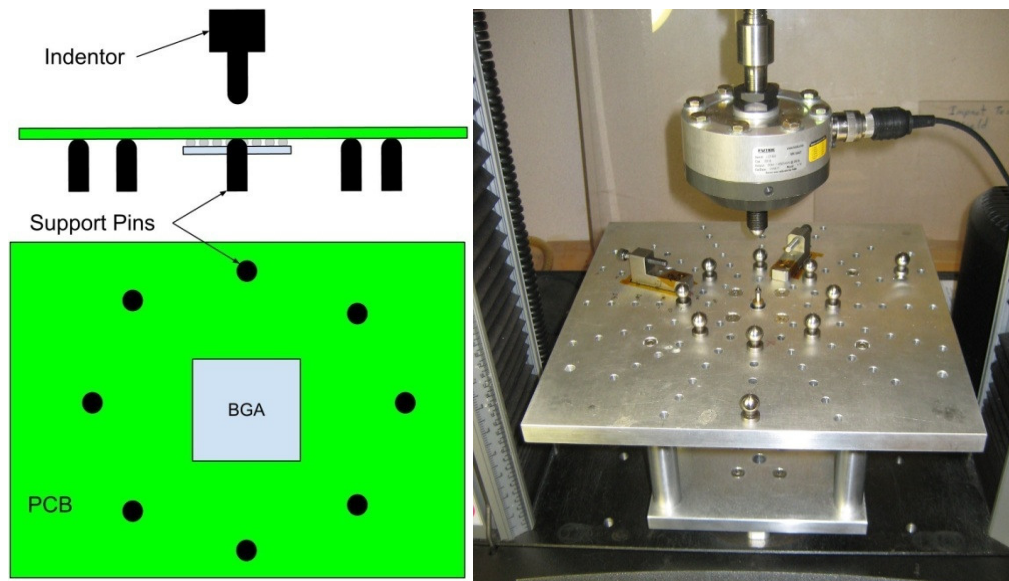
Left: Spherical Bend Test Fixture Schematic, Right: Bend Test Fixture.
